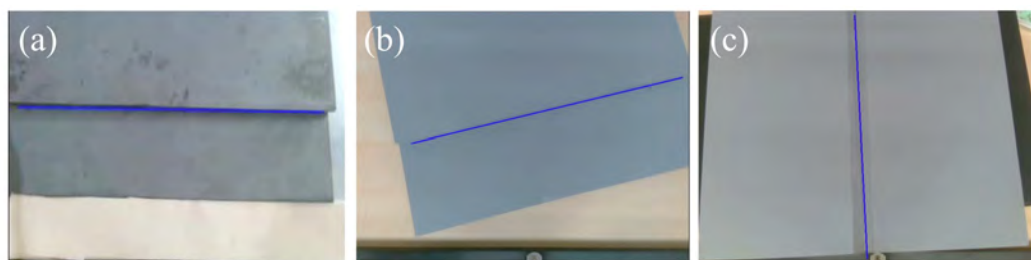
Various workpieces, where blue lines indicate the identified seam location. (a)-(b) Fillet workpieces; (c) Butt workpieces.
